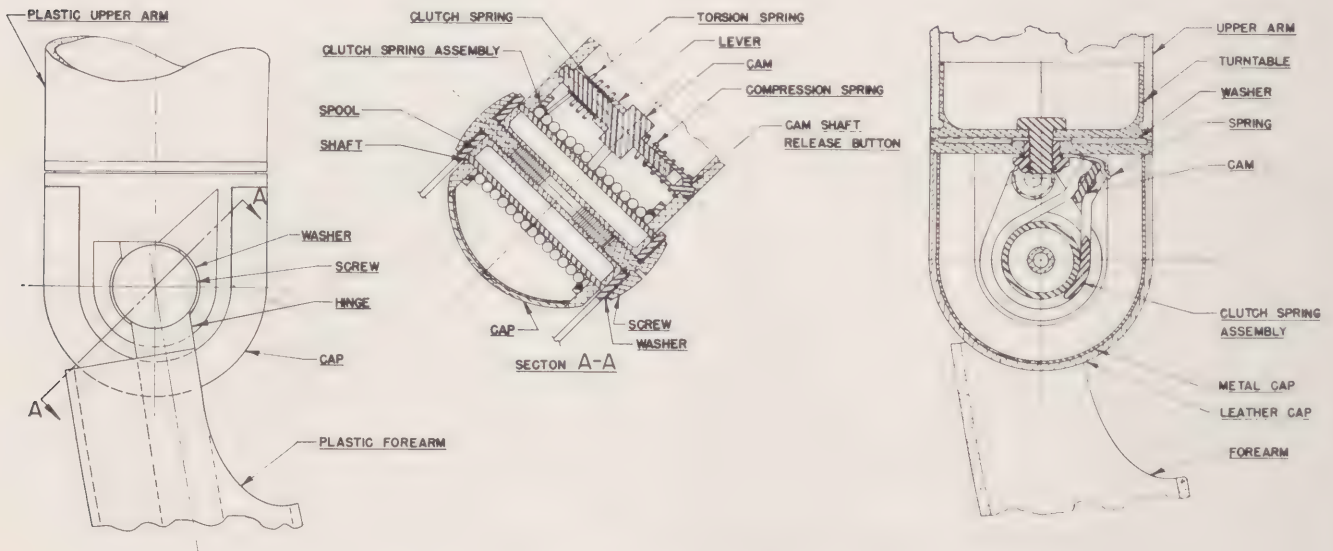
Doubly-wrapped coil spring clutch assembly.
